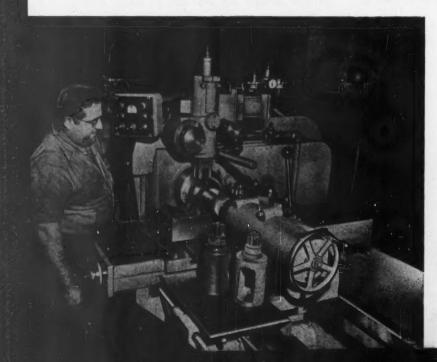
Valve plugs are turned, grooved, chamfered, and faced on this automatic lathe. Tool on air-operated overhead slide partially turns plug stem.
